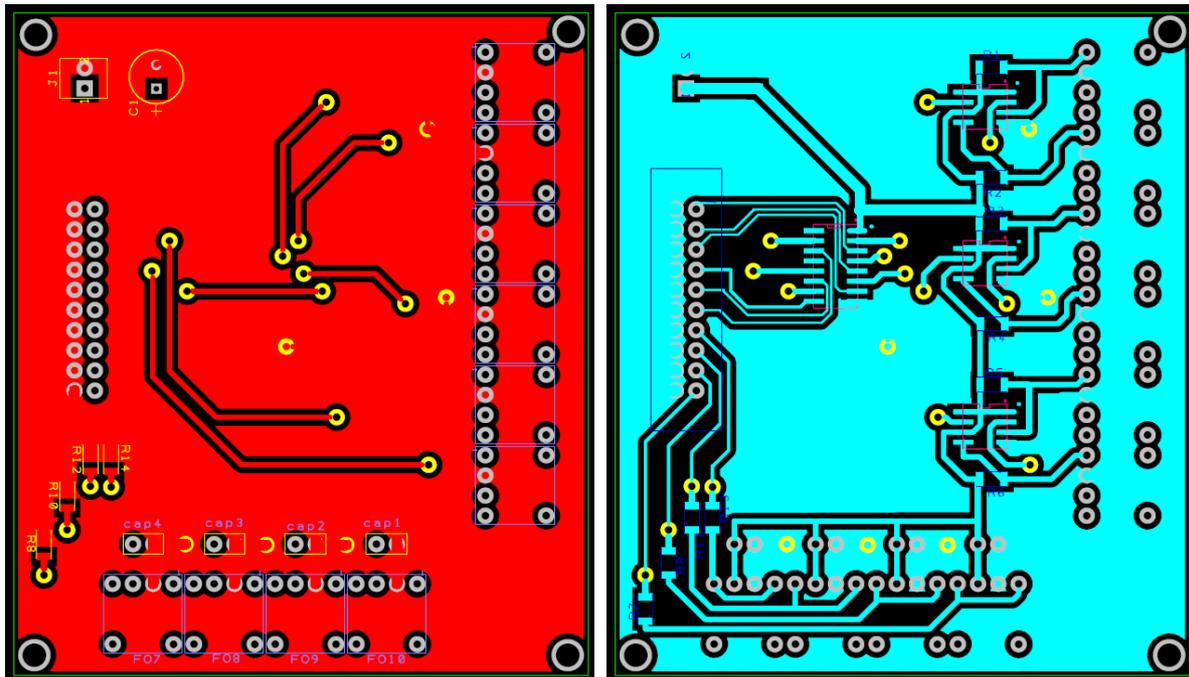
The PCB Layout of INT1. Top layout (Right), Bottom Layer (Left).
